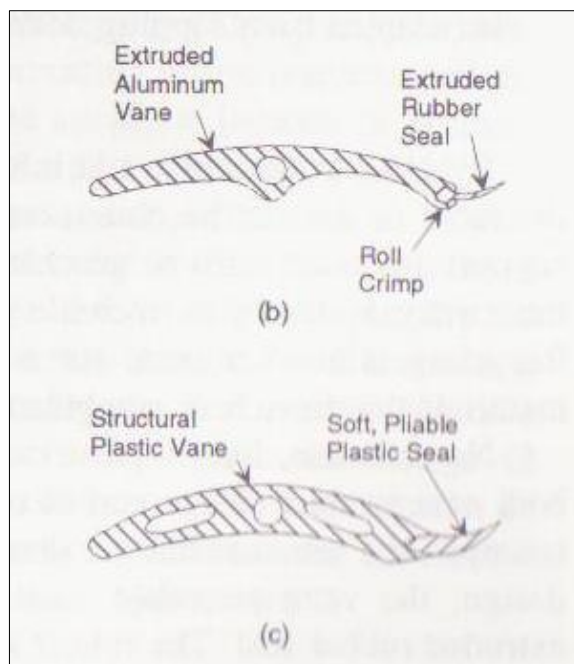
Replacing an assembly with the hybrid part: (b) cross-sectional view of the original two-piece extruded aluminum vane and extruded rubber seal assembly; (c) cross-sectional view of co-extruded hybrid plastic vane.
